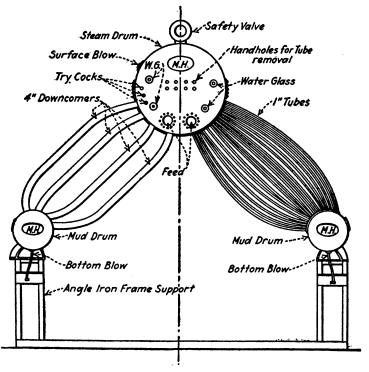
Boiler Detail before Installing Casing, White-Forster Boiler
